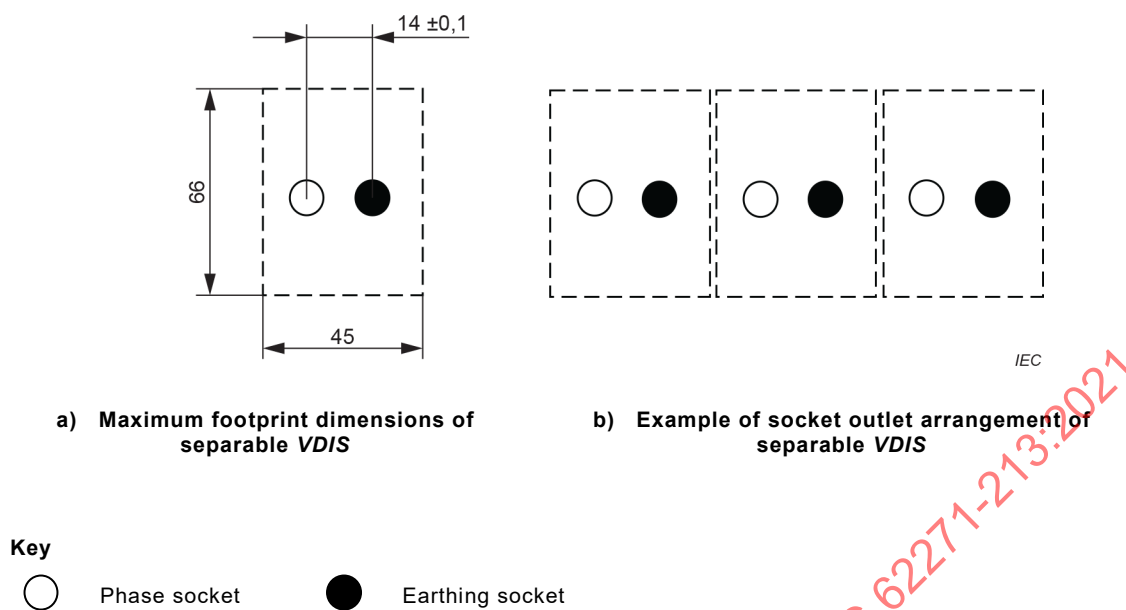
Maximum footprint dimensions of separable VDIS and example of arrangement
